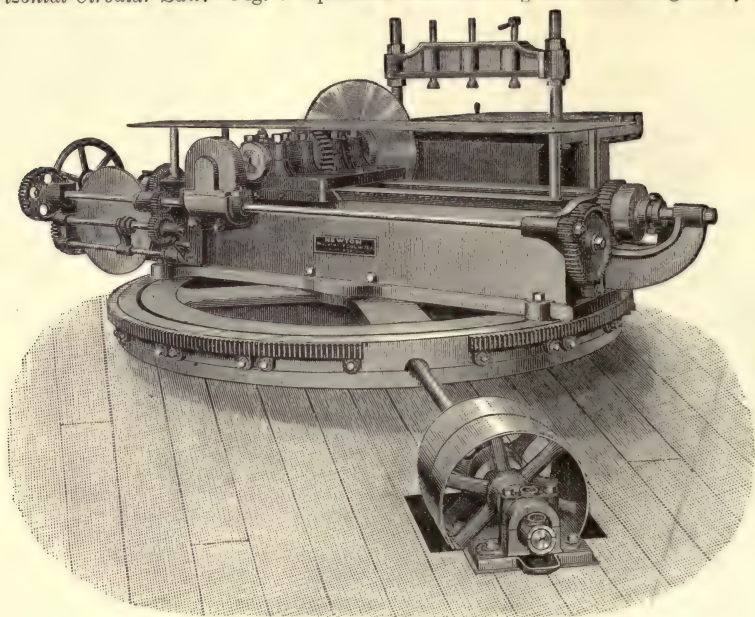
Cold saw cutting-off machine built on revolving bed.
